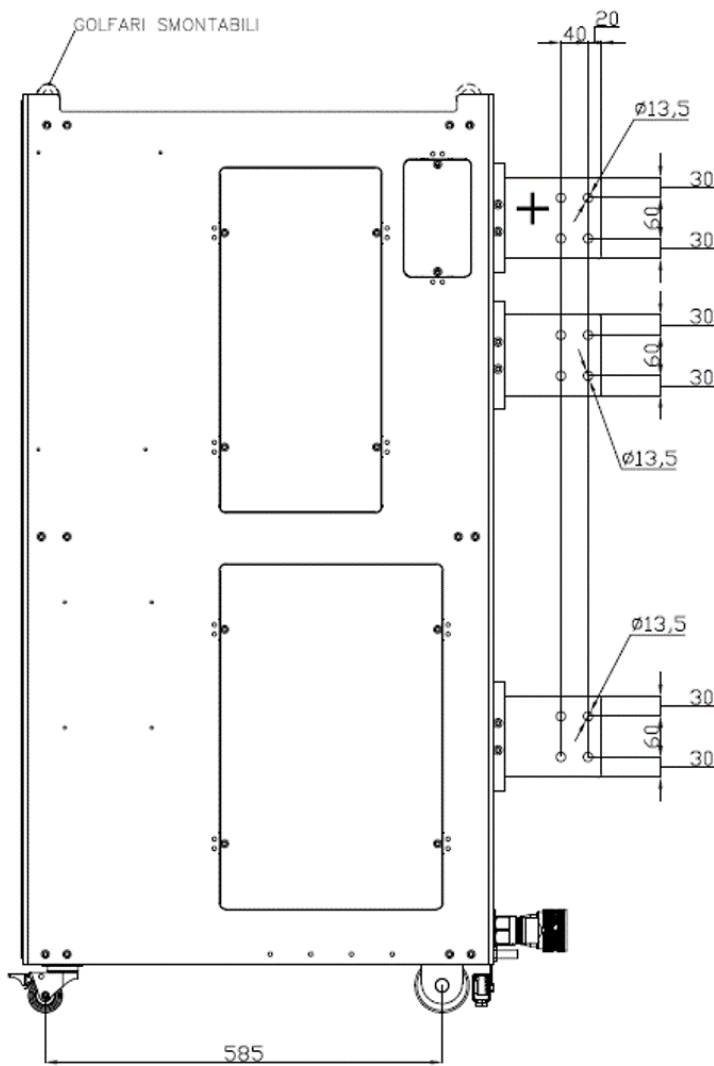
V06.LFT and SD840V06.LFT right side view
